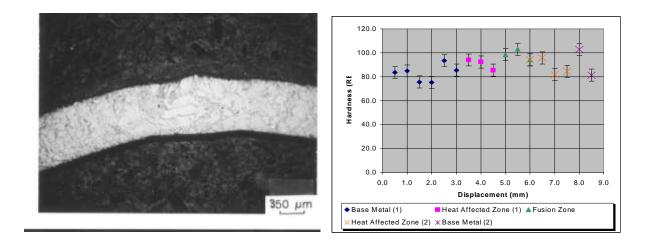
Hardness measurements taken across the fusion zone and heat affected zone of a titanium tube weld.
